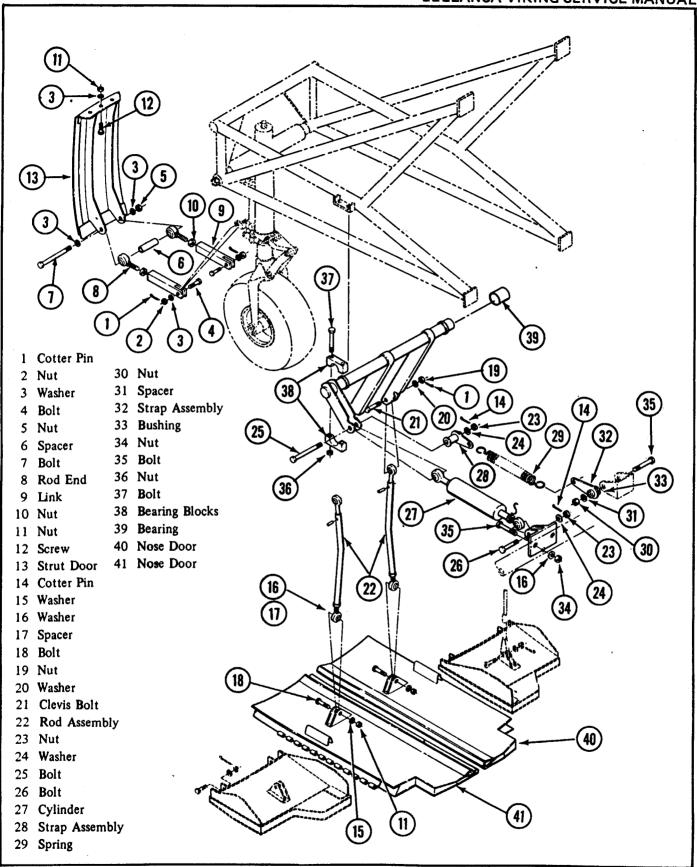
Nose Gear Door Installation, Aircraft Serial Numbers 79-30906 and above.
